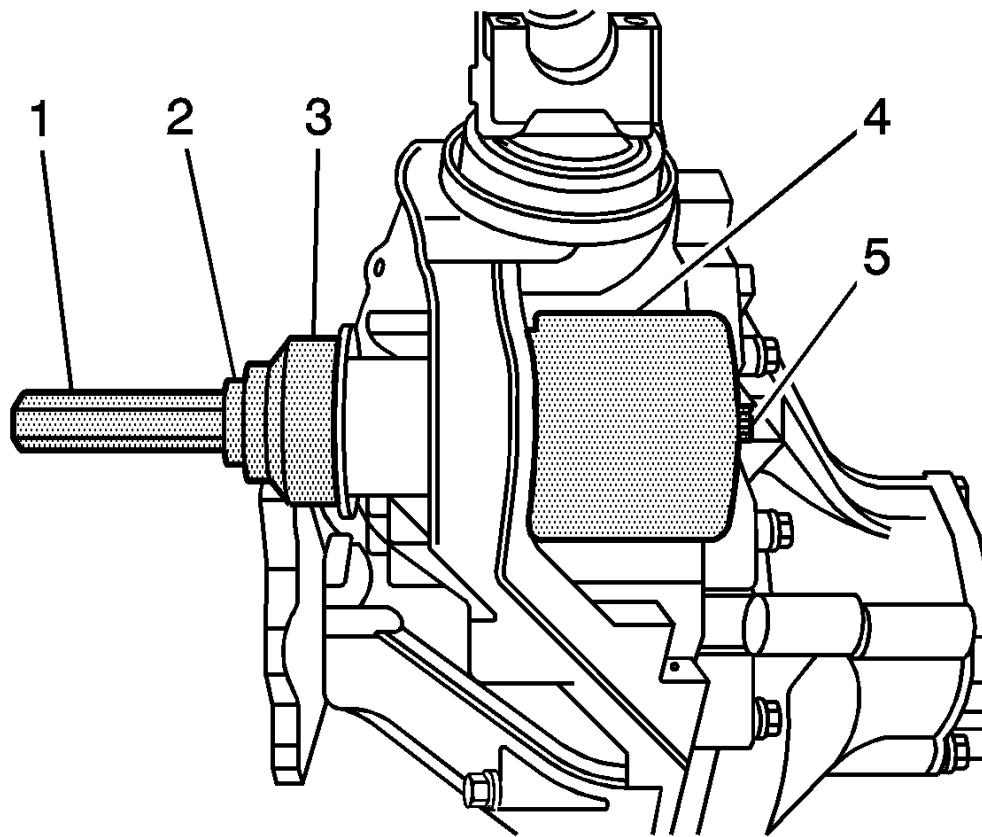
Lower Differential Carrier Assembly Bushing And Installer
